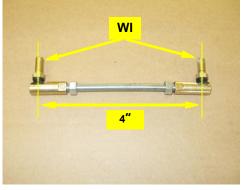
ii: Assembled threaded rod - 2nd axle type
